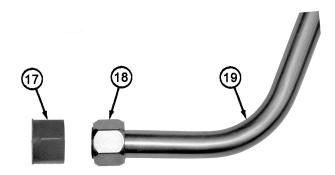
Oil Fill Tube Assembly. (X200-4A Only) (Repeated).
